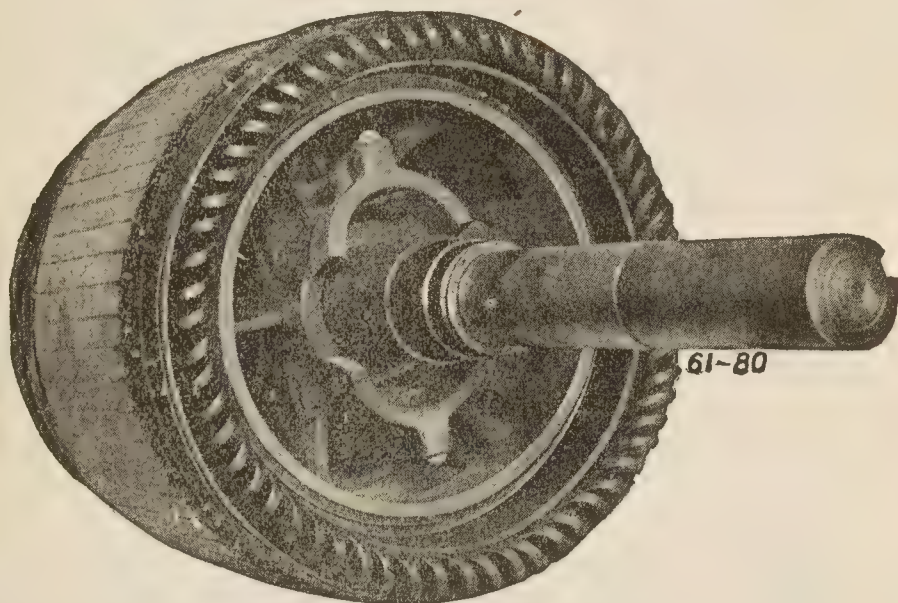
,165.—View of armature interior of Wagner polyphase induction motor with wound armature, showing the centrifugal device which at the proper speed short circuits all the coils, transforming the motor to the squirrel cage type. The winding is connected with a vertical "commutator" so called. Inside the armature are two governor weights, which are thrown outward by the centrifugal force when the machine reaches the proper speed thus pushing a solid copper ring (which encircles the shaft) into contact with the inner ends of the "commutator" bars, in this way completely short circuiting the armature winding.
